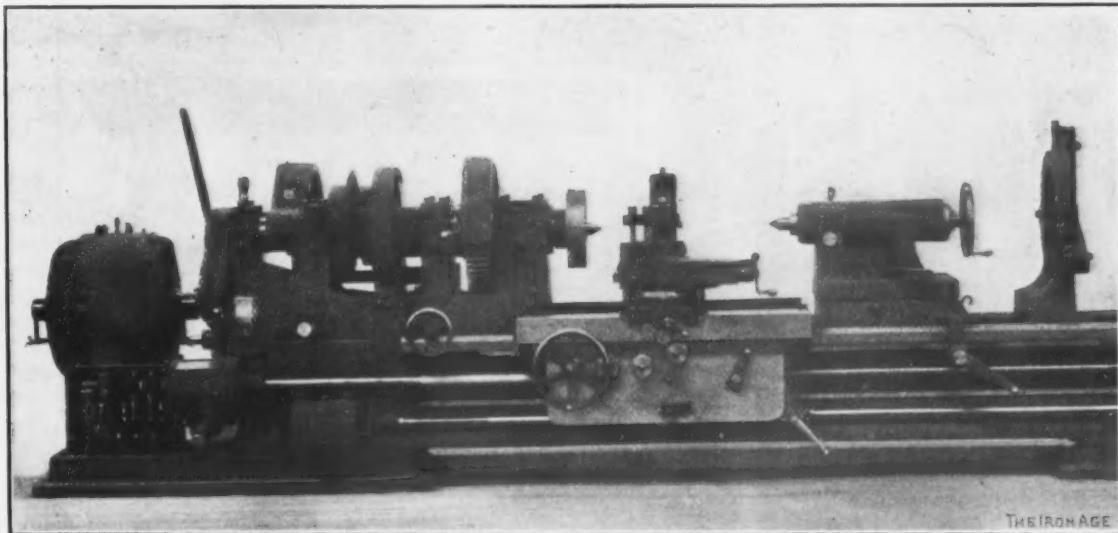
A 36-In. Standard Patent Head Lodge & Shipley Lathe with 10 Hp. Triumph Motor.
